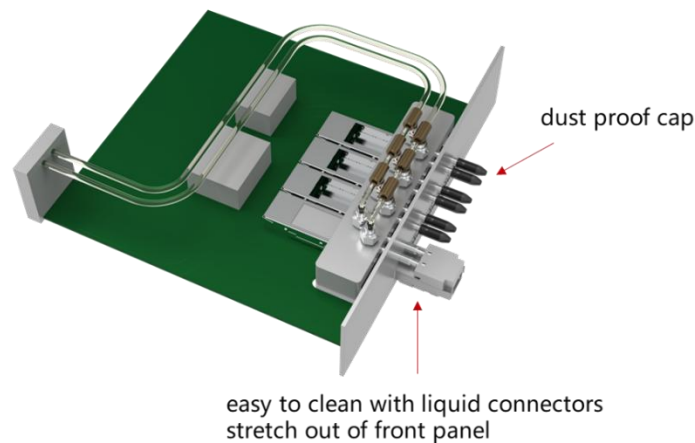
Head-side LCO inspection and cleaning, with a dust proof cap on the host side
